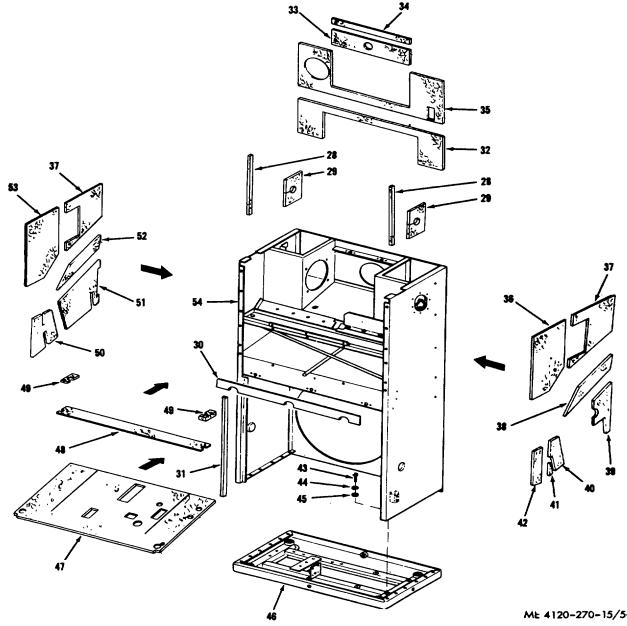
(1). Thermal insulation, casing and base assembly, exploded view..
